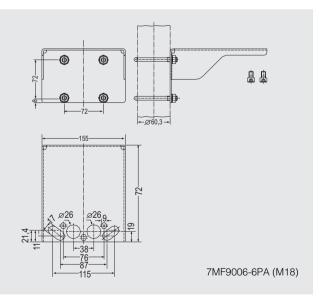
/104 Mounting bracket for five-spindle valve manifolds, dimensions
